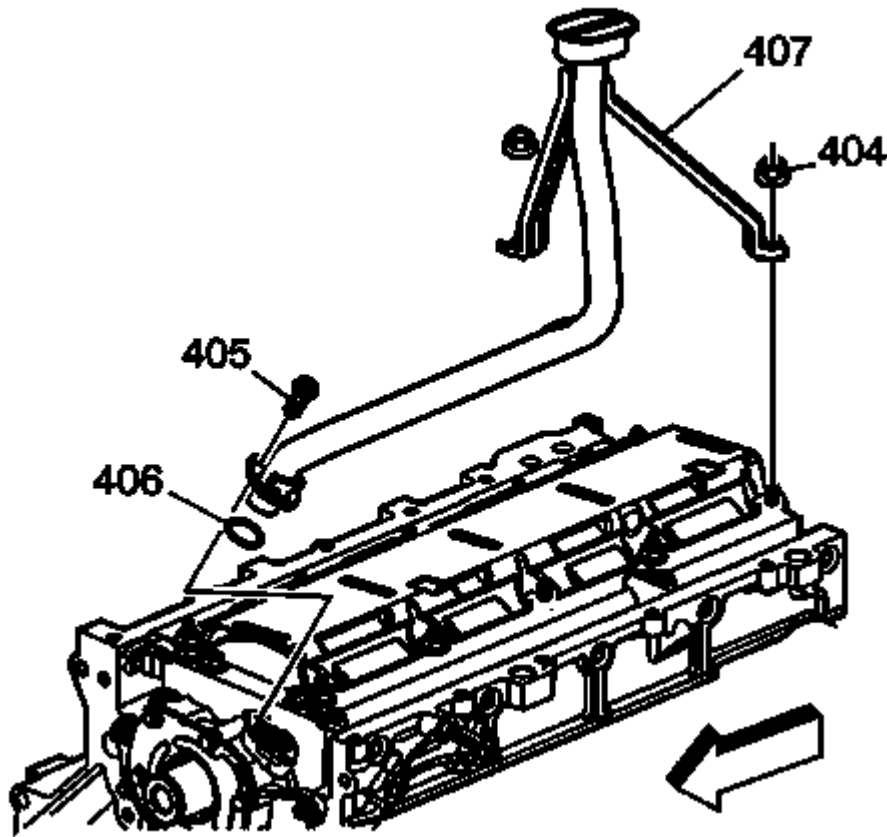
View Of Oil Pump Screen, Bolt, Nuts, & O-Ring Seal
